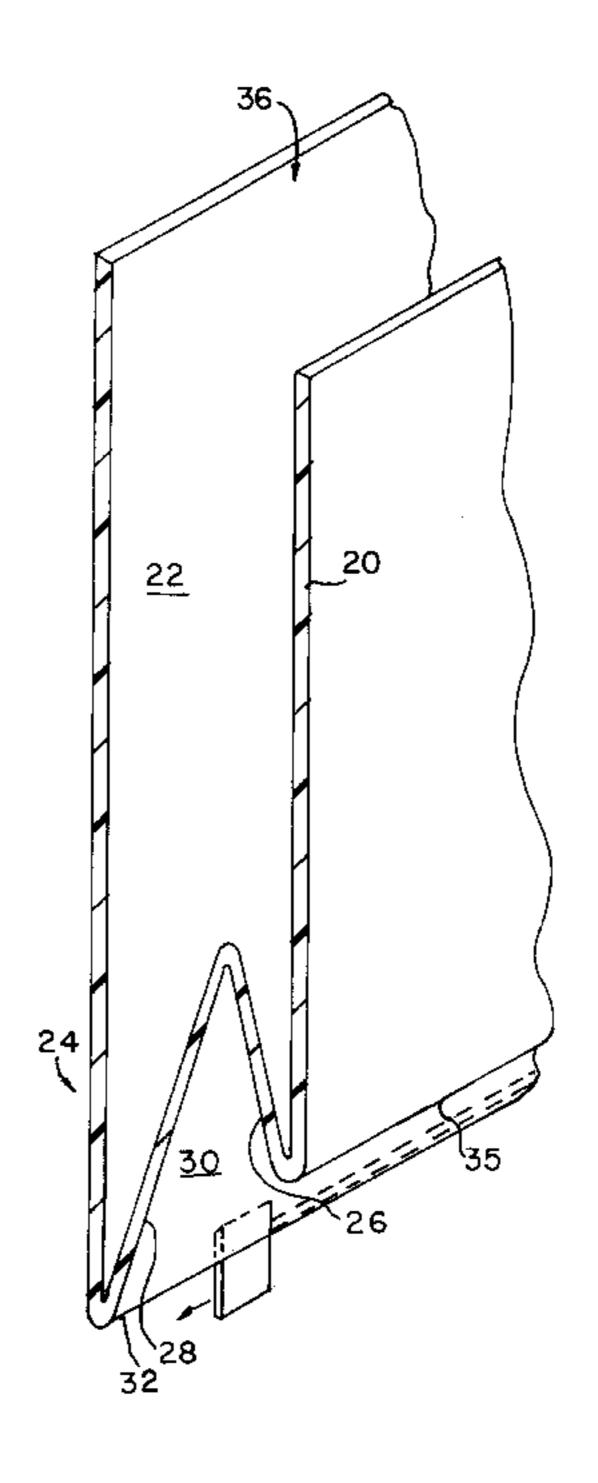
Drawing, A Method of Folding that Produces a Gusset Bottom in Thermoplastic Film, Tenneco Packaging, Inc., Lake Forest, IL, p. 2.
